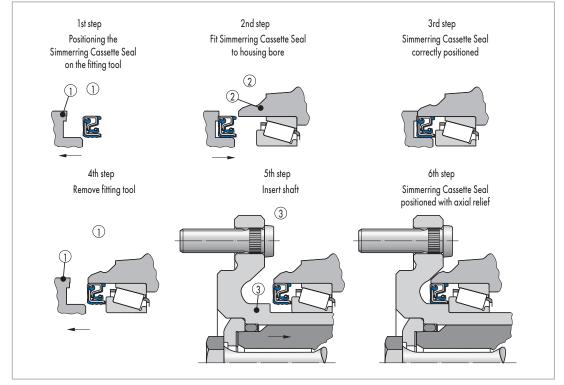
Fitting of Simmerring Cassette Seal - Case A (with "bearing stop")
